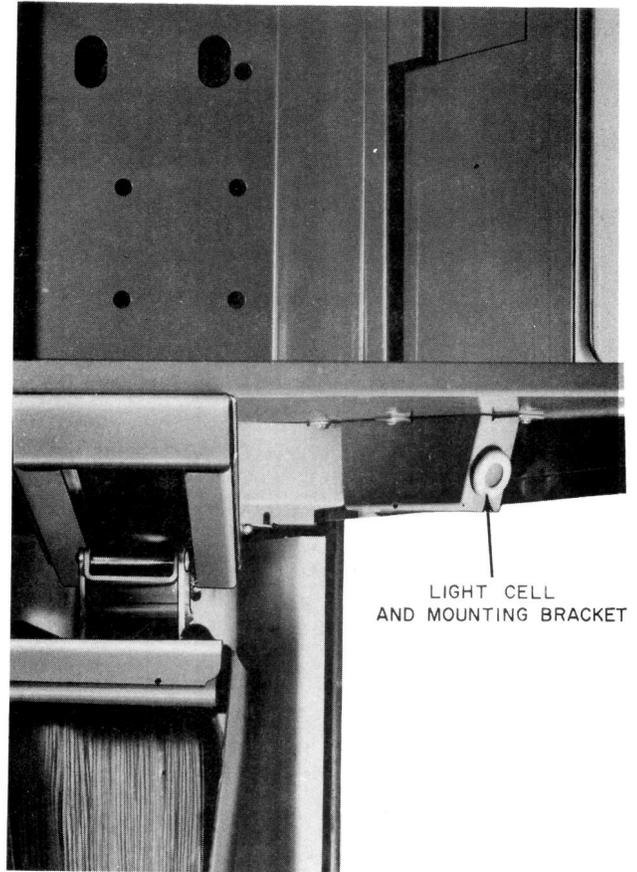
Installation of Mounting Bracket on KS-19426 Mounting
